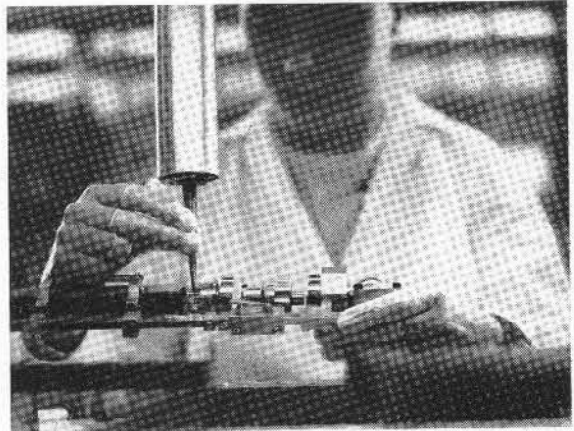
The completed electrode assembly is spot-welded to the pins of the base. The jig in which the welding operation is carried out ensures concentricity of base and envelope.
